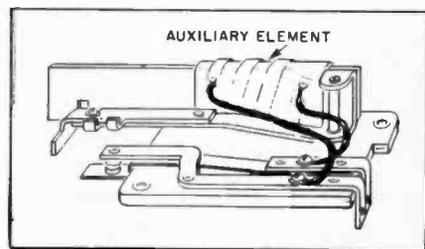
Timing mechanism of a popular toaster is shown, together with its auxiliary heater.
